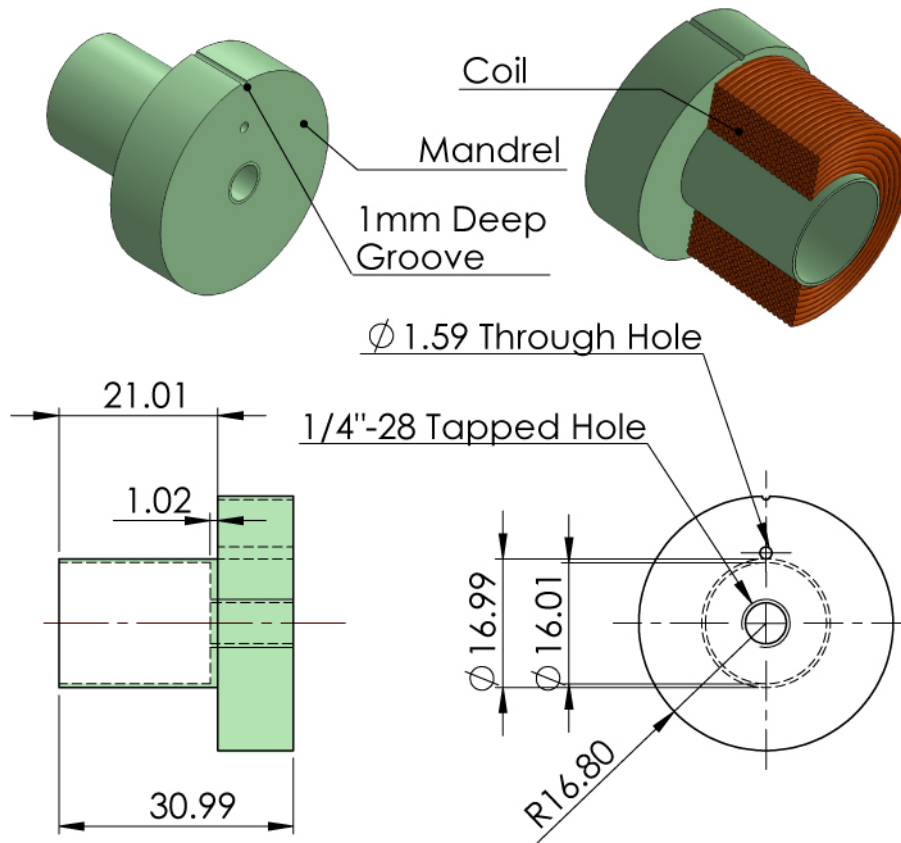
VCA coil assembly. Dimensions in [mm].
